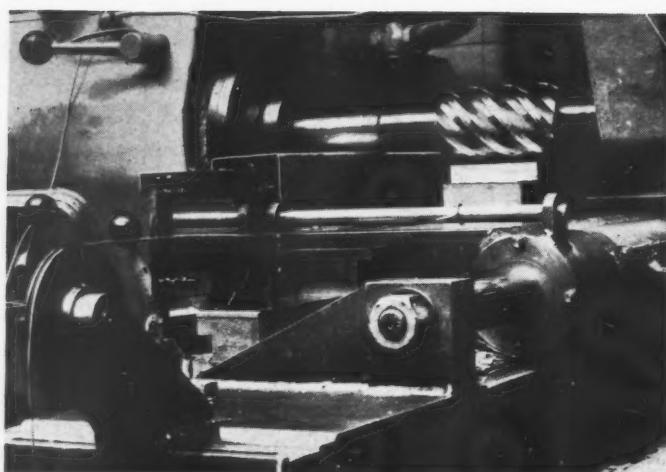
Slideway test rig (plain slides mounted on a horizontal milling machine).
